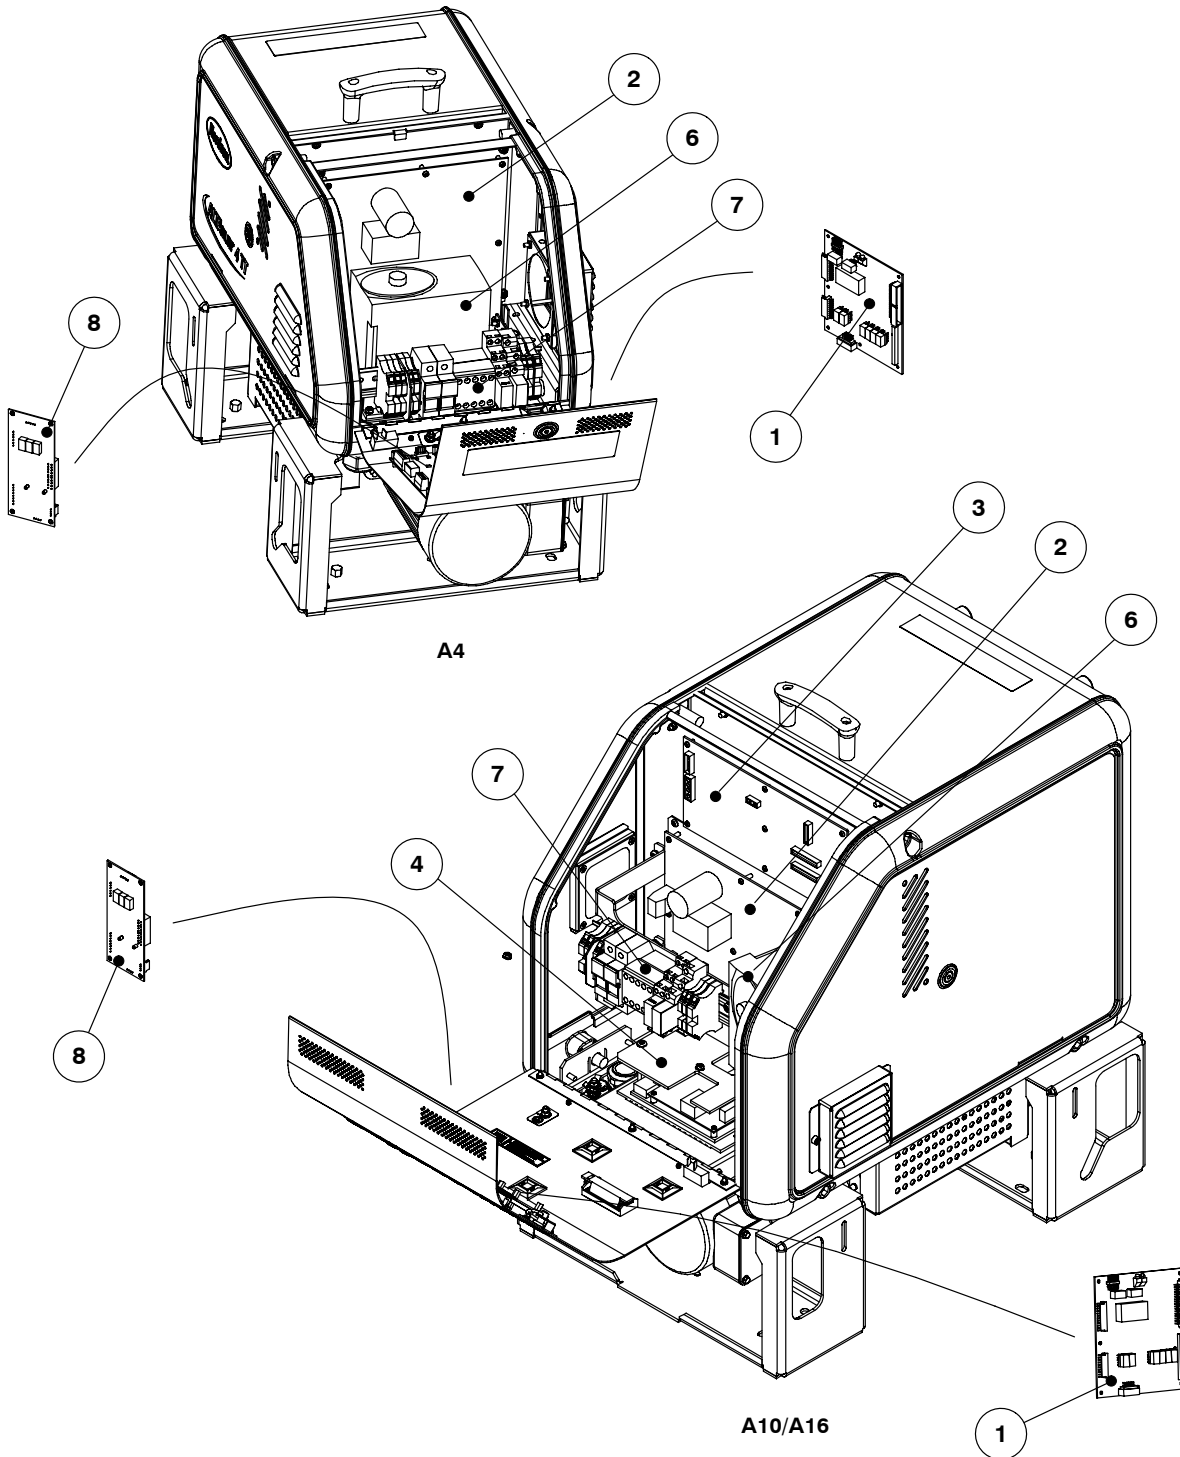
Circuit boards on melters with a motor control terminal block assembly
